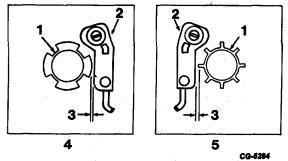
Trigger Wheel-to-Sensor Air Gap
